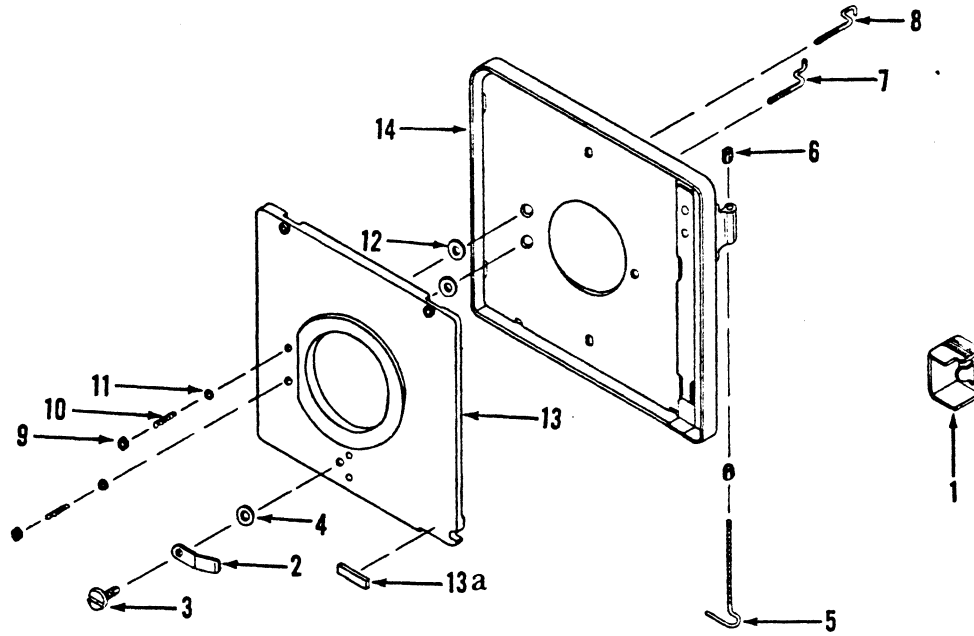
LENSBOARD COMPLETE FOR #1 GRAPHEX OR RAPAX SHUTTER
